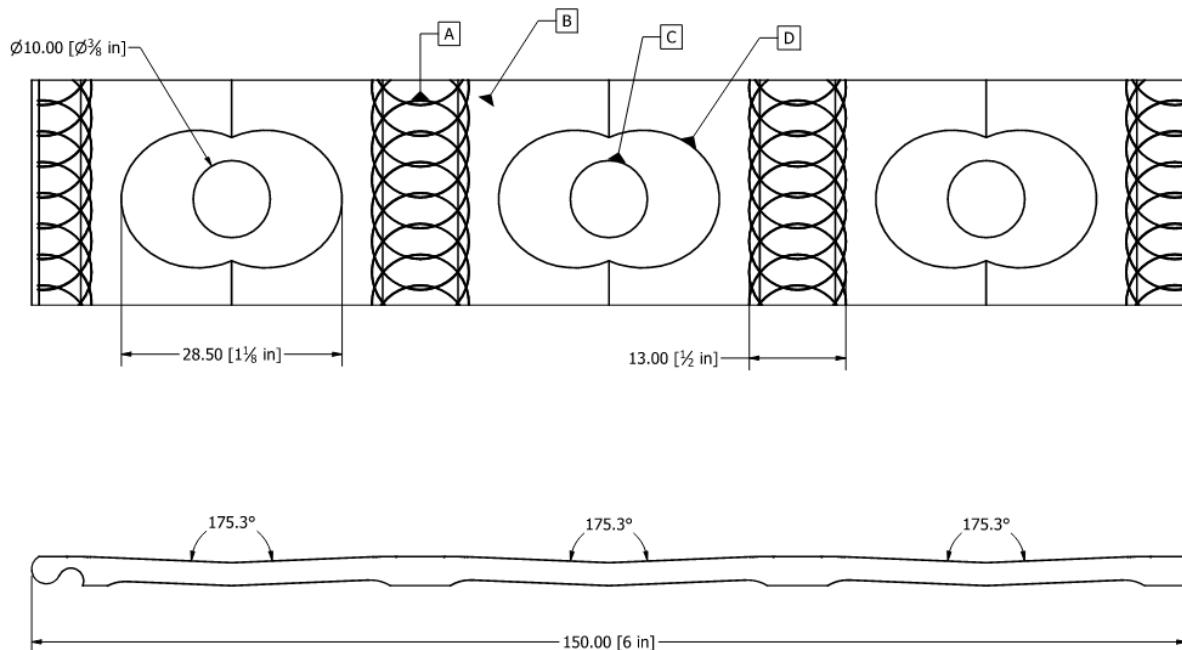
Dimensional drawing of top surface of Safespill floor. All dimensions in millimeters [inches].
